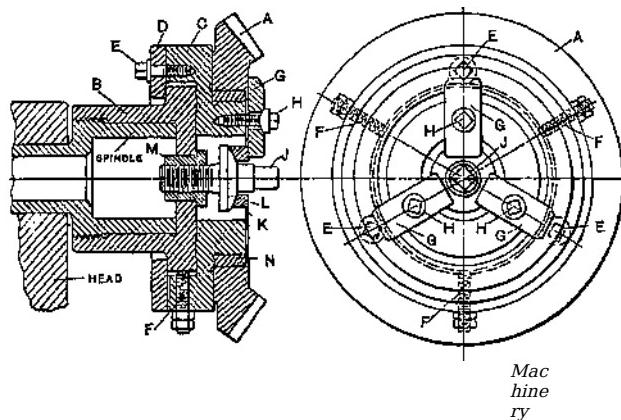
Ring Bevel-gear Fixture provided with Adjustable Clamps
